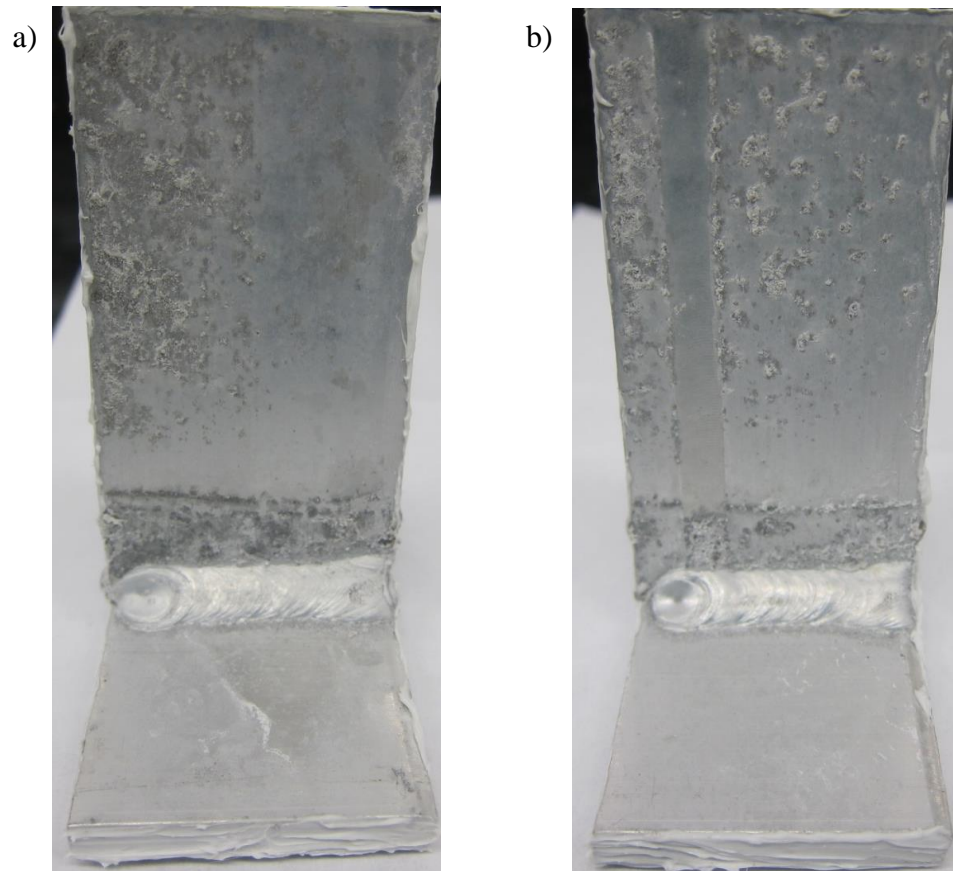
Duplicate samples of T-joint welded configuration F1 (ER5356/AA7108/L) in the as-welded T6 condition.
